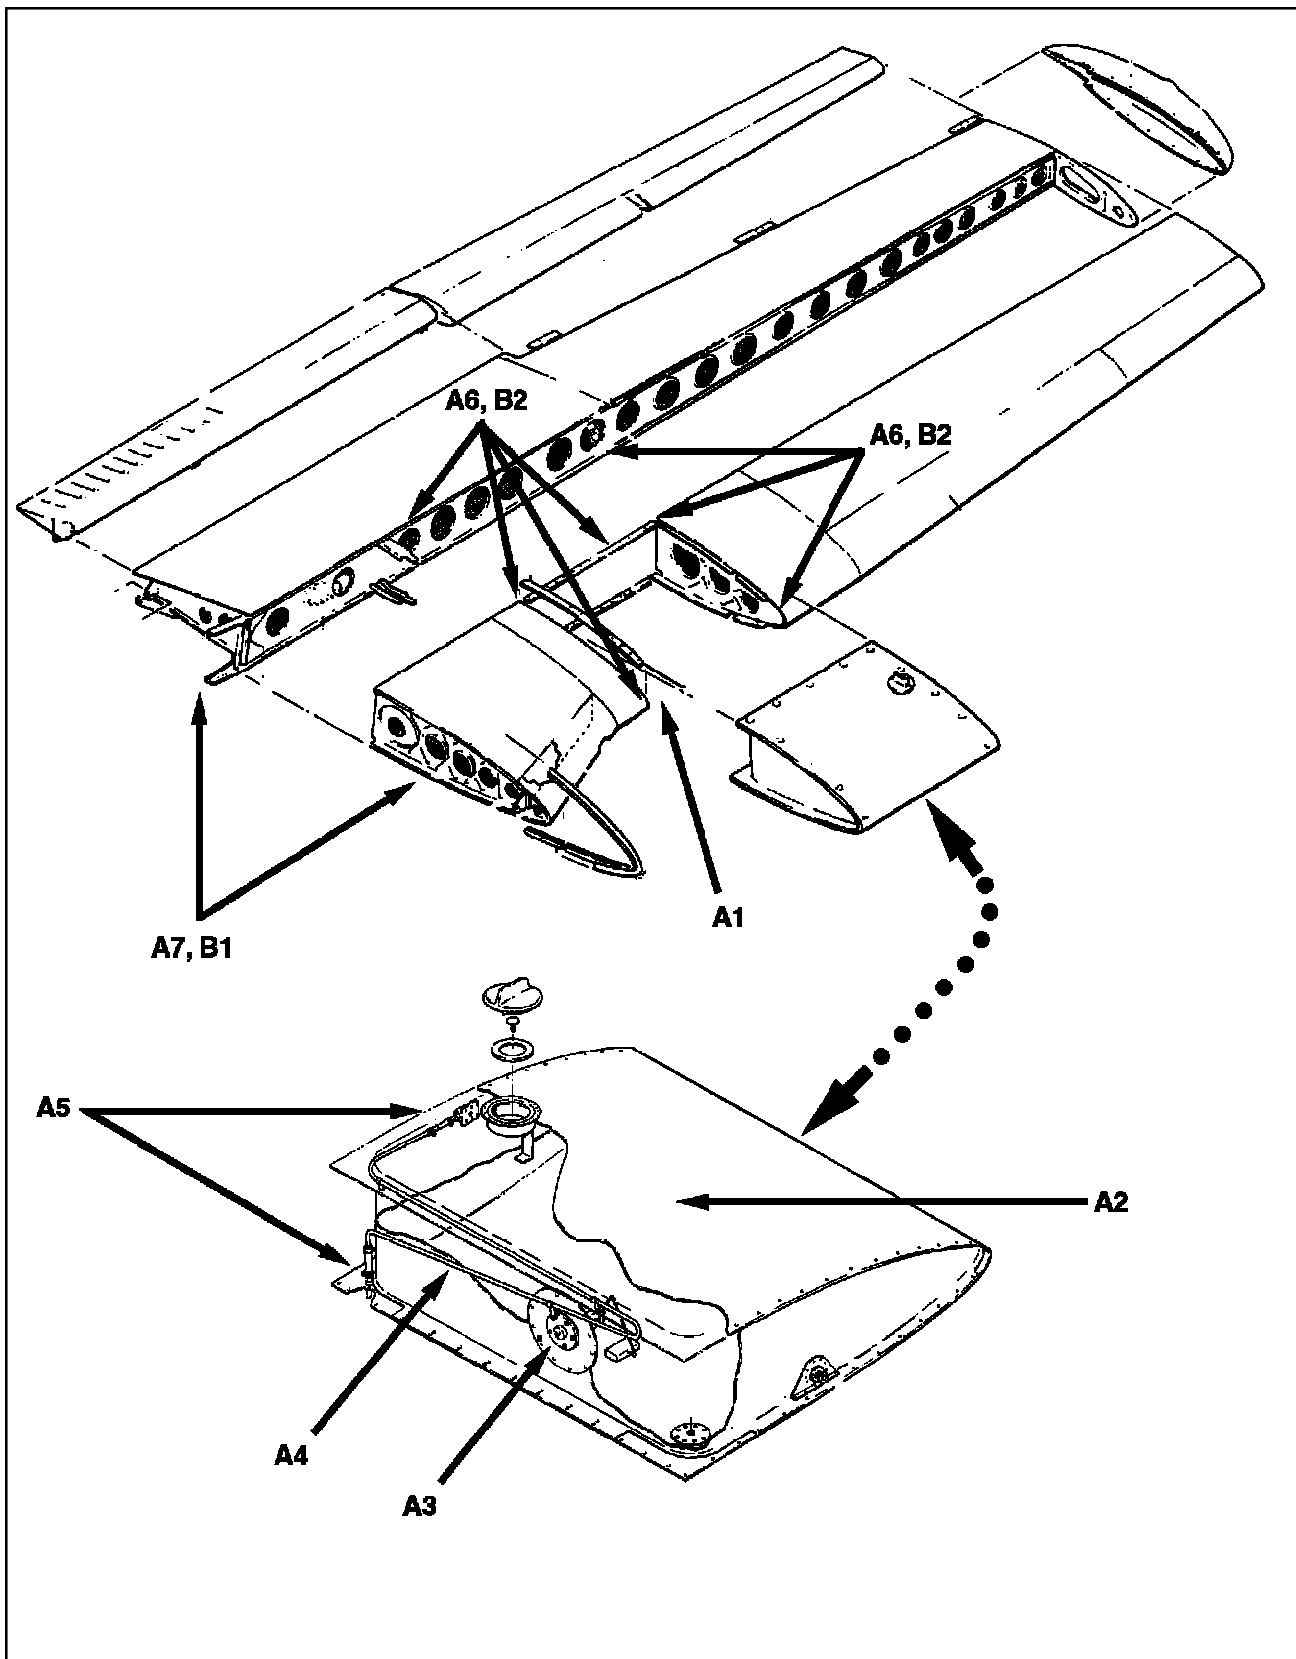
Fuel Tank and Wing Spar Corrosion Inspection
